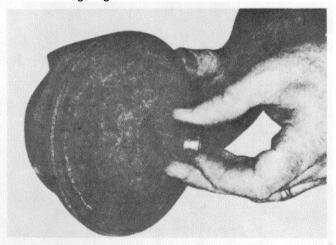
L-19. Removing the Bearing and Washer (Turbine End)
